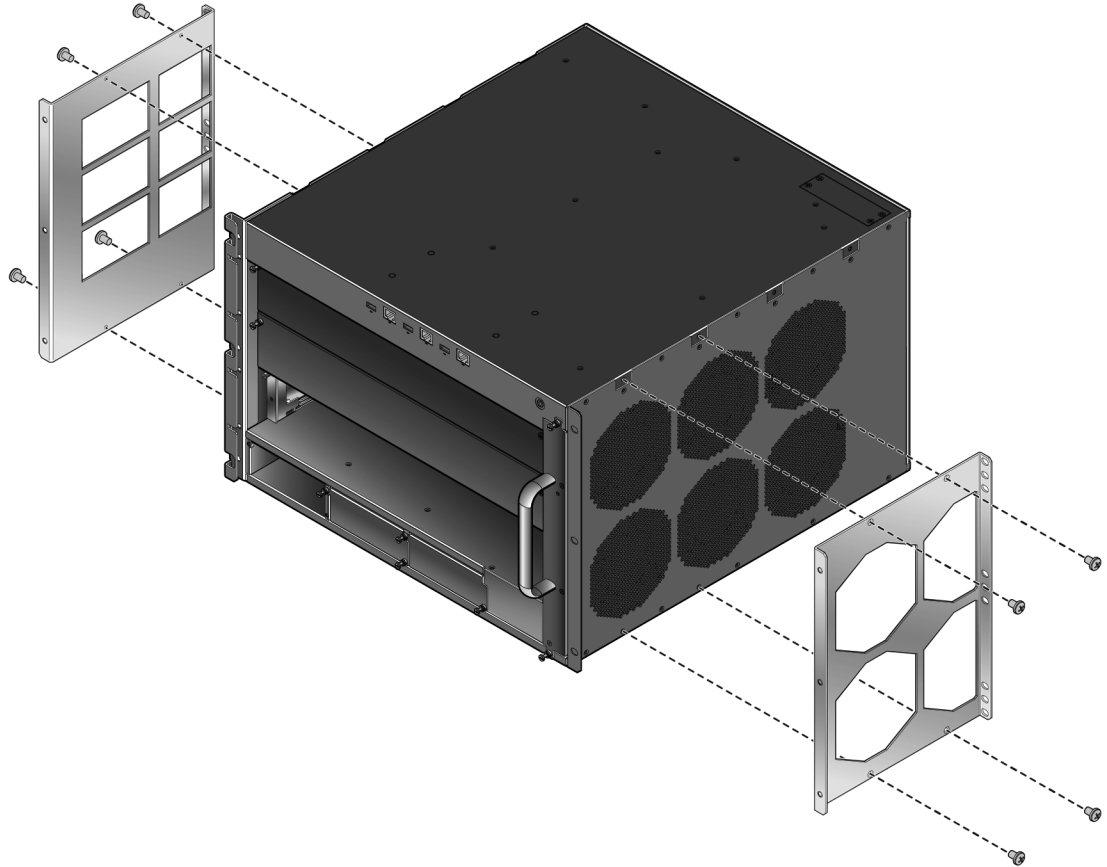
Screws to Remove if a PoE Subsystem is Installed on an S3 Chassis
